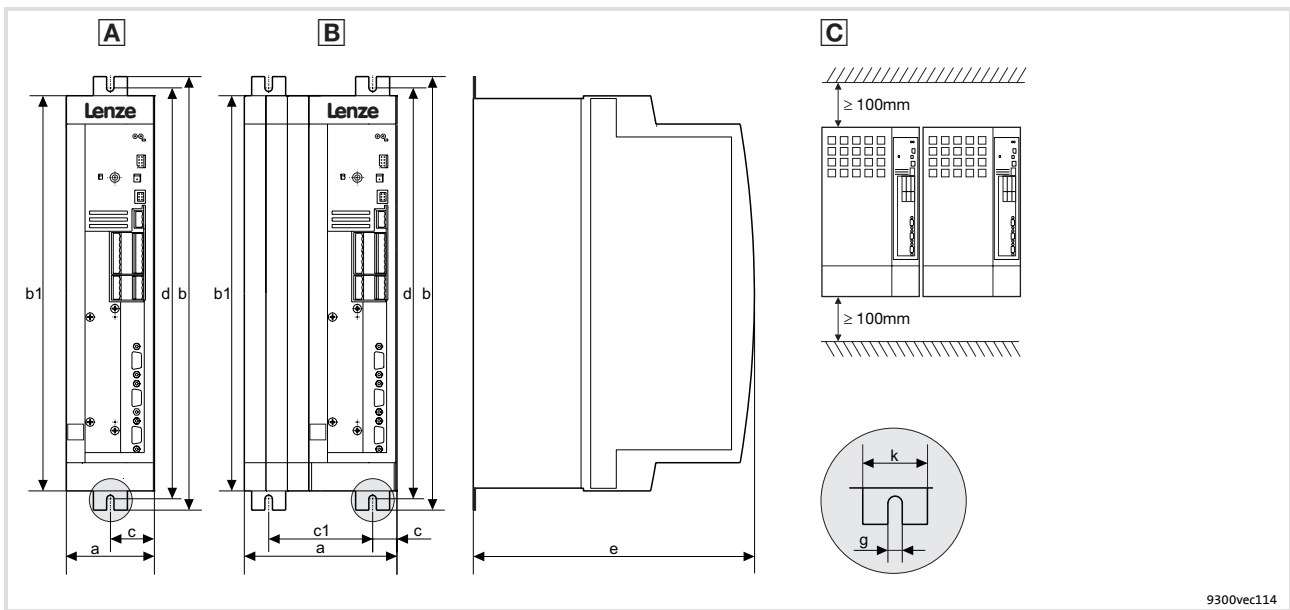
Standard mounting with fixing rails 0.37 ... 11 kW
